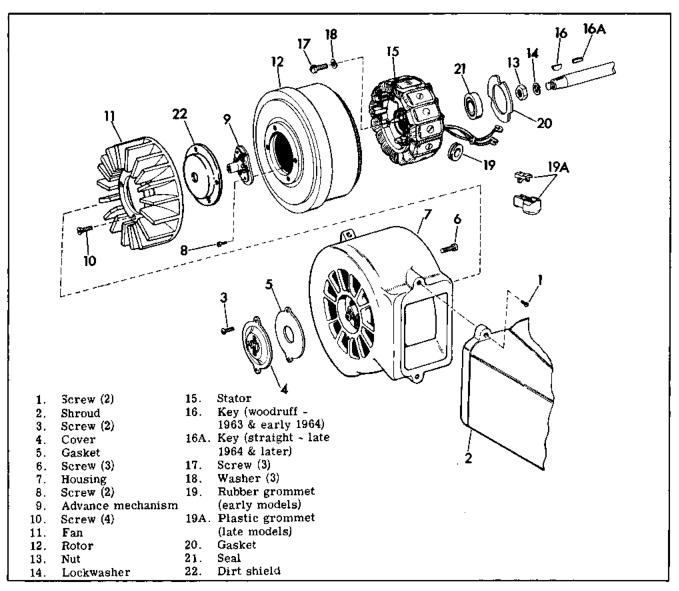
E-21. Starter-Generator (1963-66 Model D, 1967 & 68 Model DC) - Exploded View
